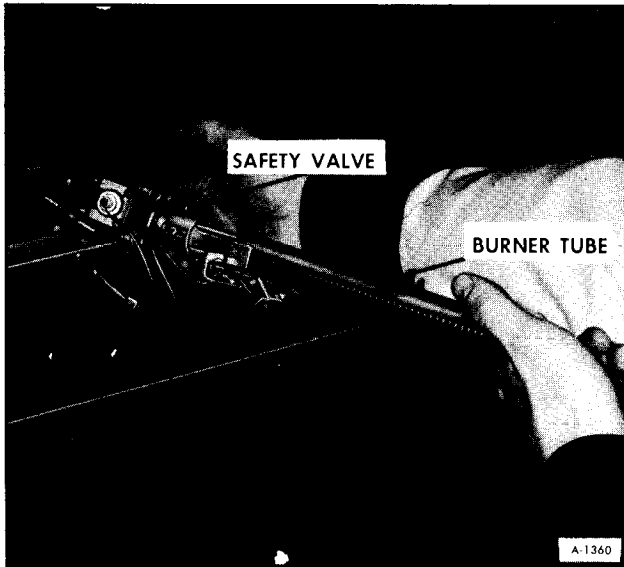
Removing Burner Tube and Safety Valve as a Unit
